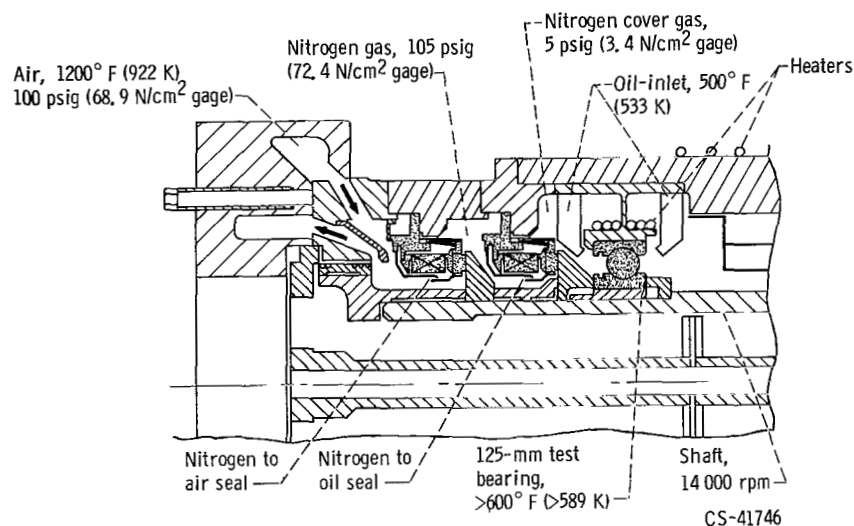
Bearing and seal assembly in simulated engine sump of inerted lubrication system.
